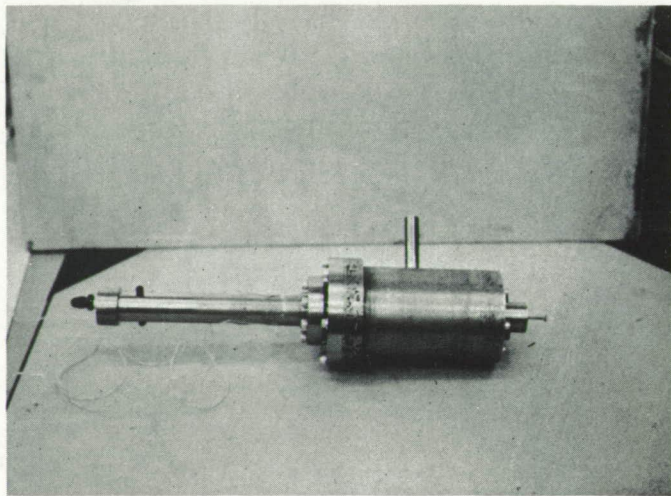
Instrumented and Assembled Swaged Gasketed Ferrule in Pressure Test Fixture
